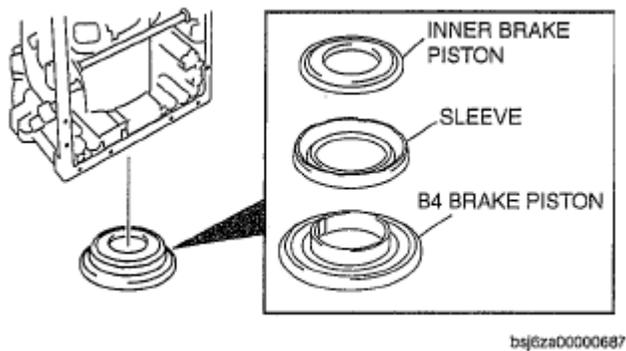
Identifying Inner Brake Piston, Sleeve And B4 Brake Piston
